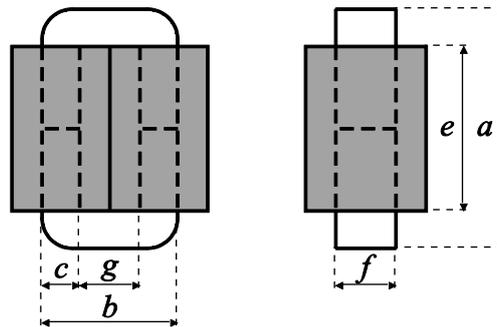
Inductive component based on two C core halves with windings (grey) and geometrical dimensions. Note that two windings are used.
